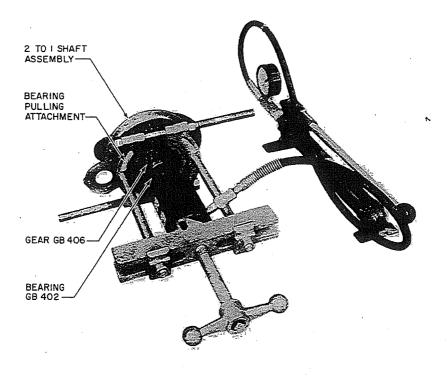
2 to 1 Shaft, Removal of Gear GB406, Spacer GB405, and Bearing GB402
